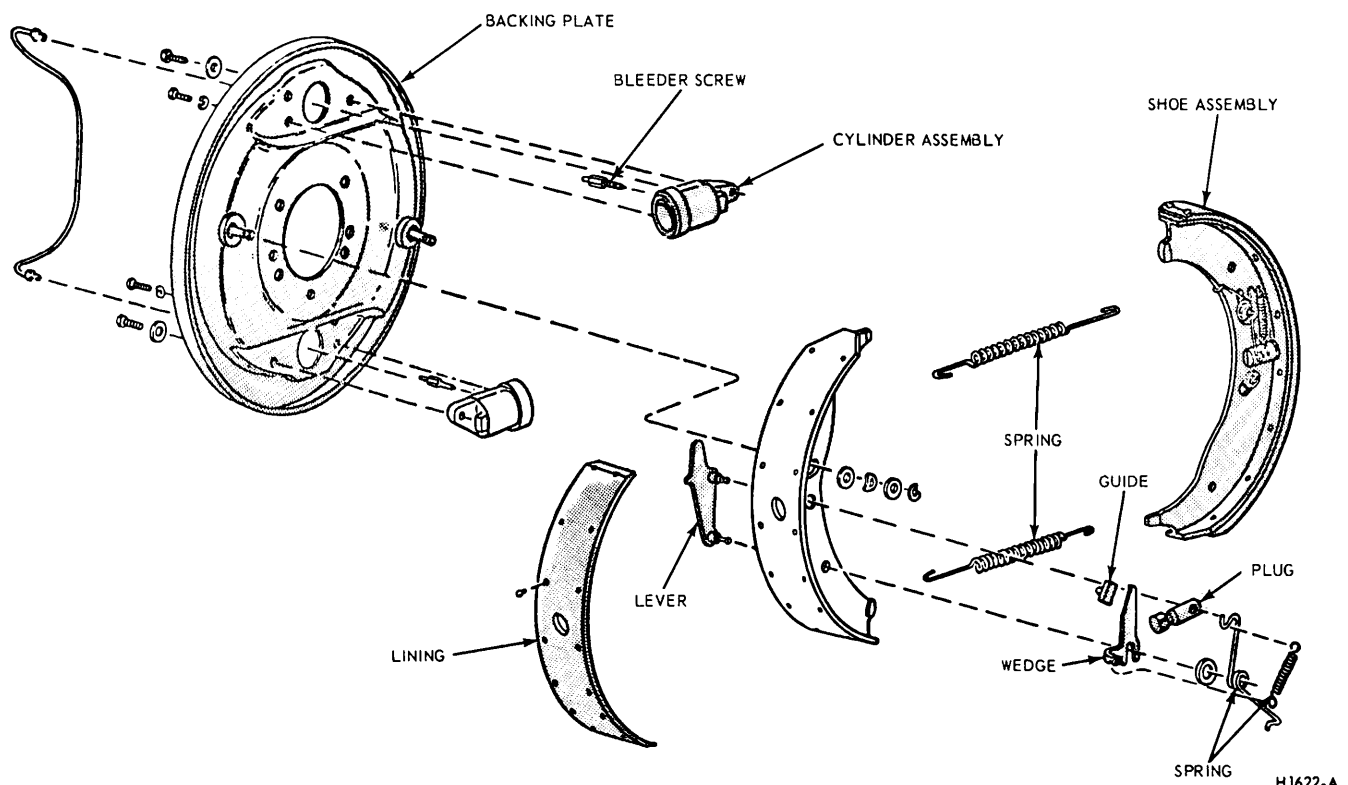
Two-Cylinder Brake Shoe (Wagner) Front—Disassembled View
